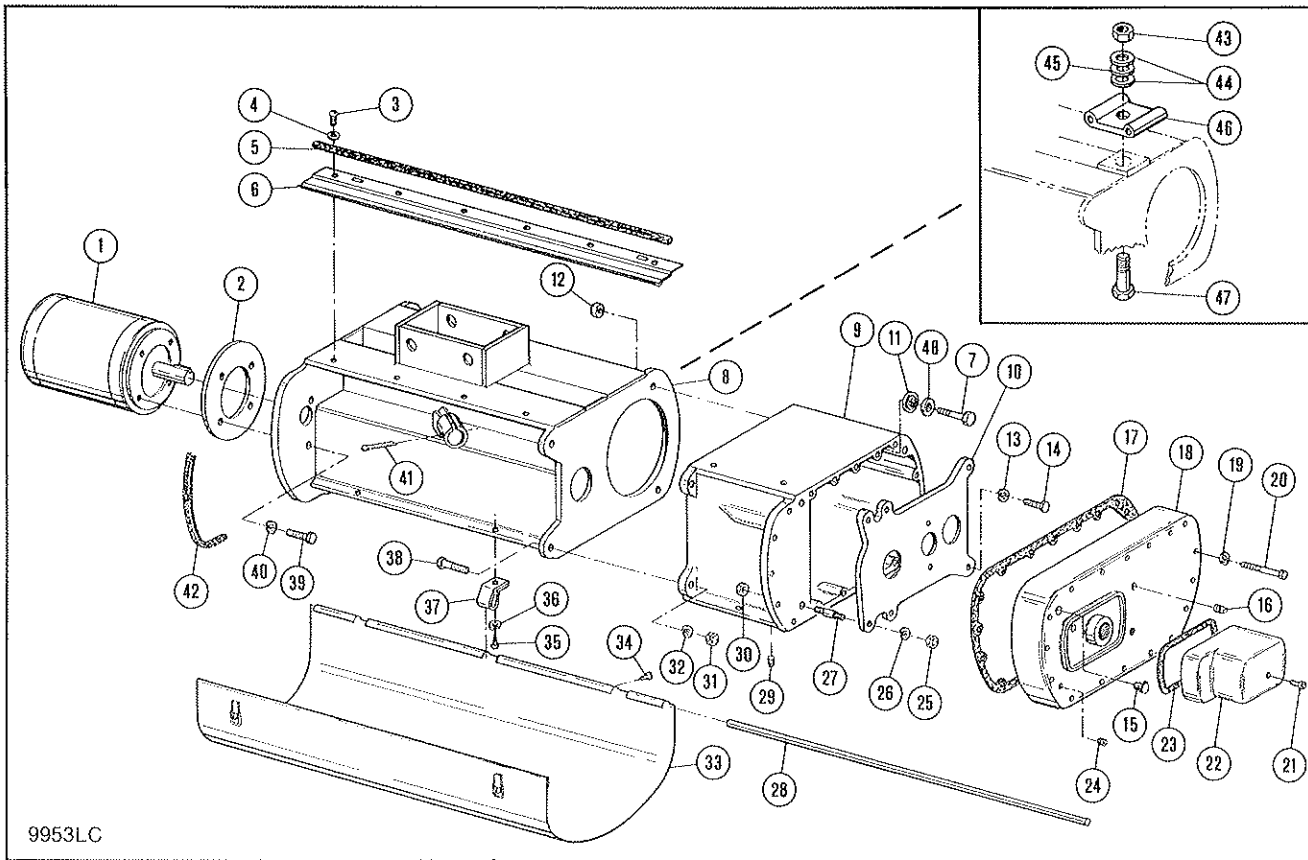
Frame, Gearcase, Motor and External Covers.
